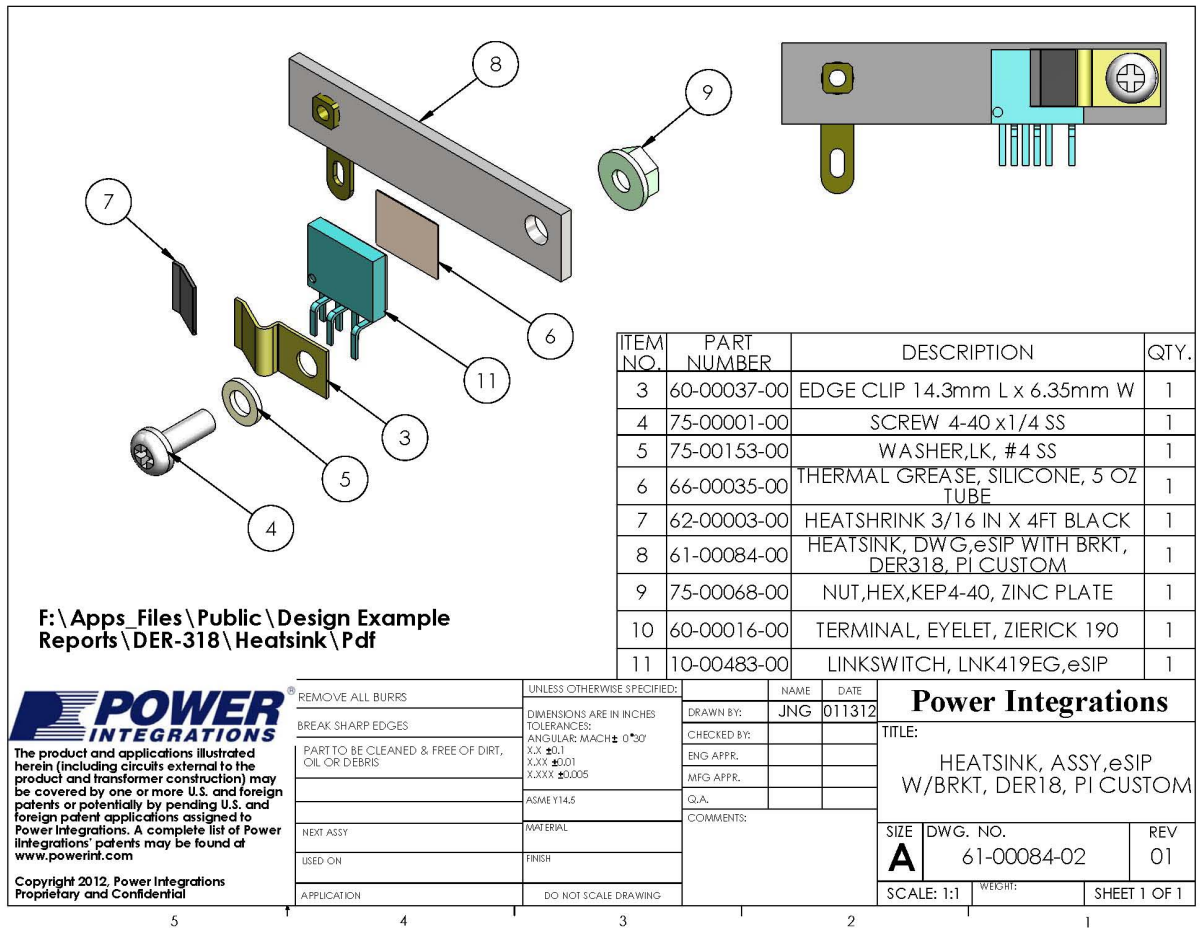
Heat Sink and LinkSwitch-PH Assembly Drawing.
